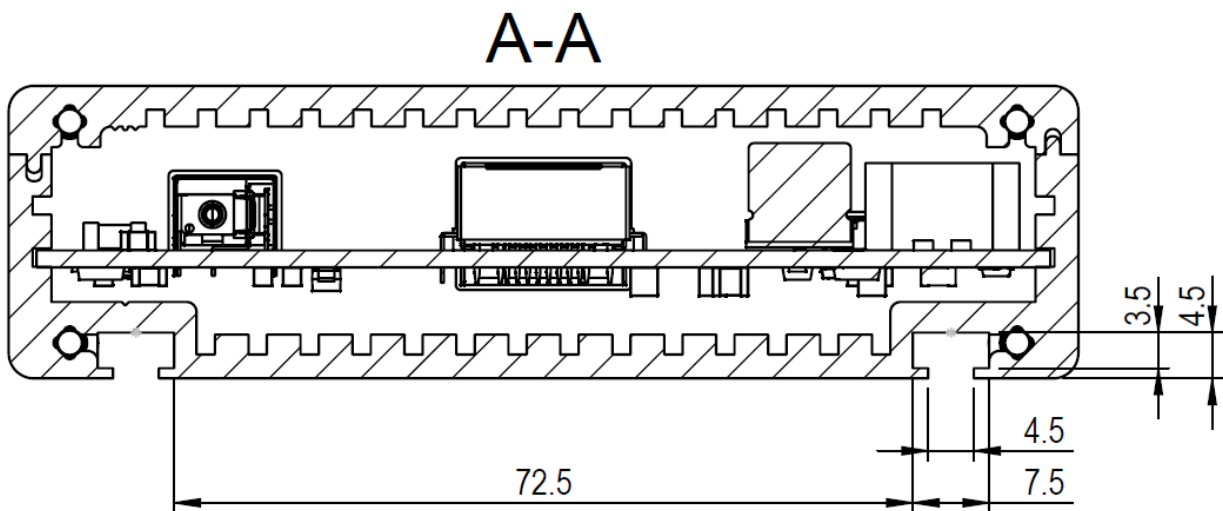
ICC-1C casing cross section A-A with the dimensions for the DIN rail adapter
